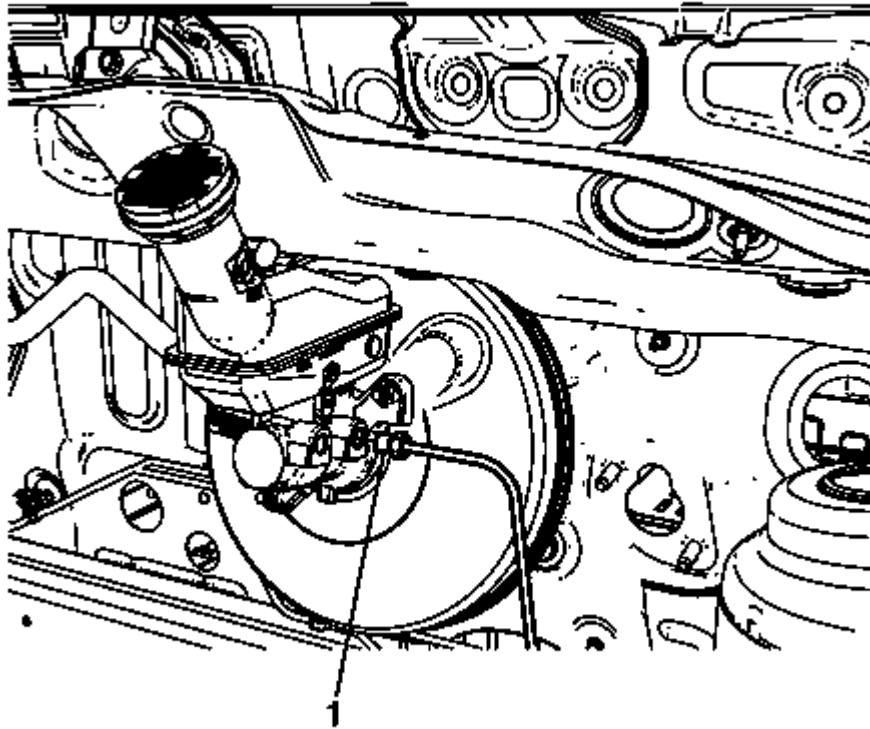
Master Cylinder Primary Brake Pipe Fitting
